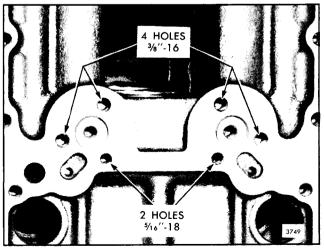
Location of the Four 3/8-16 Bolt Holes in Rear of Cylinder Block
